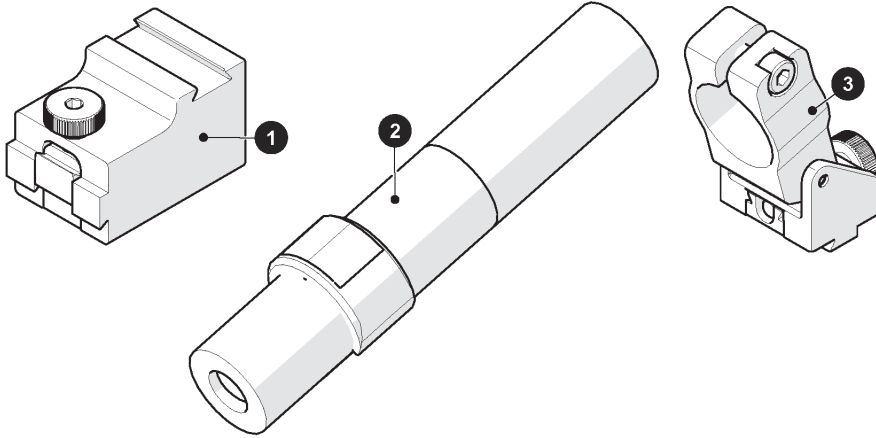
Laser guide spare parts (or complete kit [PN: Q7750081])
